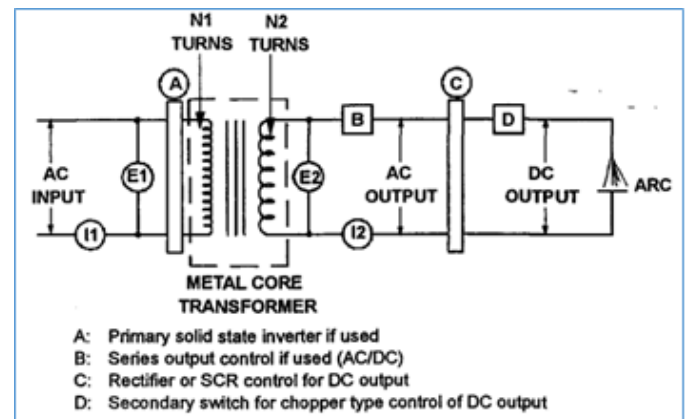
Showing a transformer in a power source of a welding machine [3].
